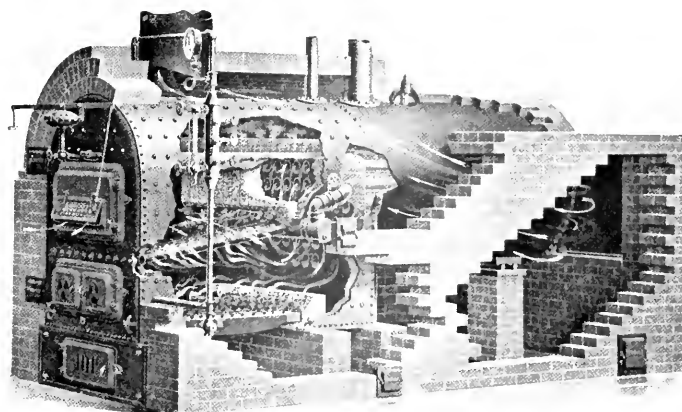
SECTIONAL VIEW, SMOKELESS FIREBOX BOILER.
